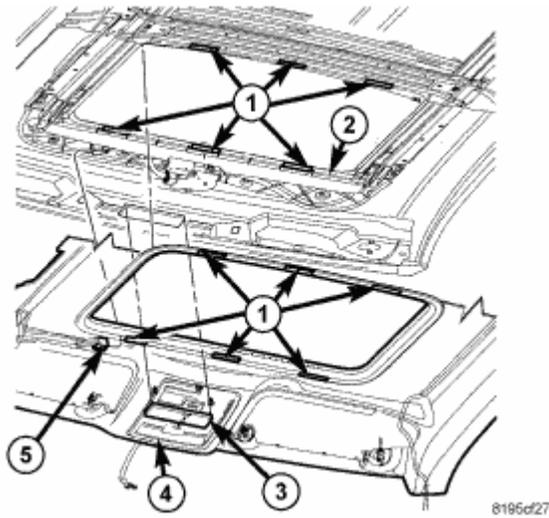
Dual Lock Areas, Sunroof, Spacer Foam Blocker, Headliner & Sunroof Motor Jumper
